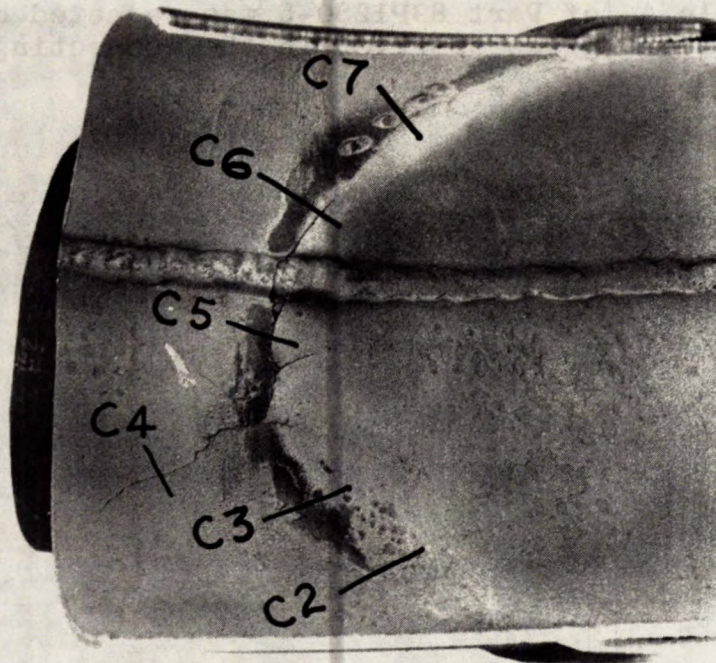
Sample A, showing inner surface of Y-tube below the weld with the connecting tube. Locations of microsections are also shown. Approx. full size.
